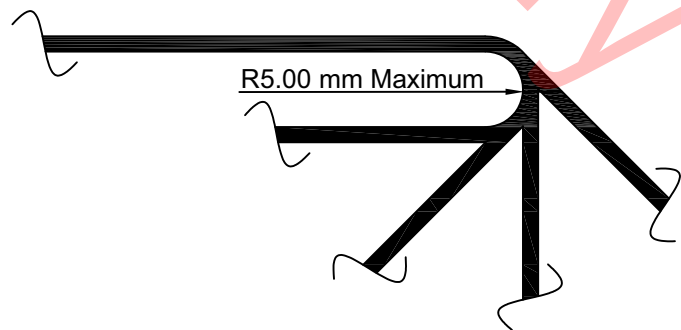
Limit Bend Radius Of FPC And FFC Cables
